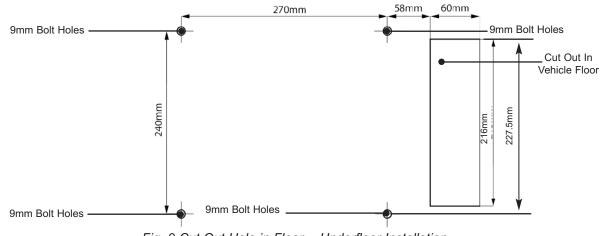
Cut Out Hole in Floor - Underfloor Installation
